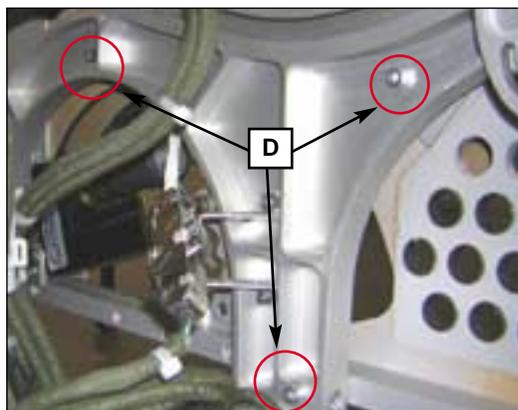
B: OUTBD ENDBAY, INNER VIEW
